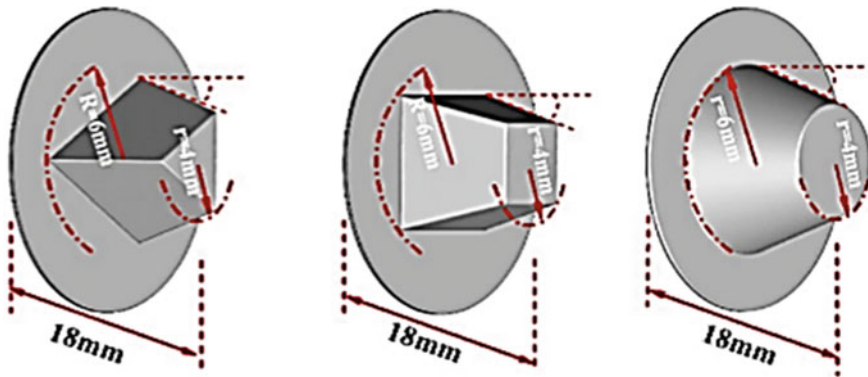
Tool pin shapes utilized to fabricate the joint [34]
